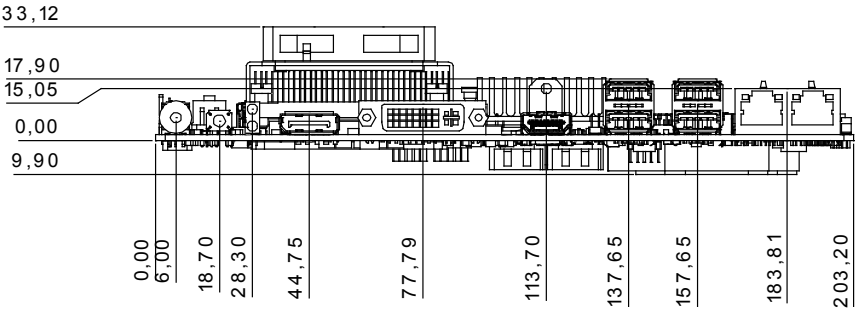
MIO-9290 Mechanical Drawing (Coastline)
